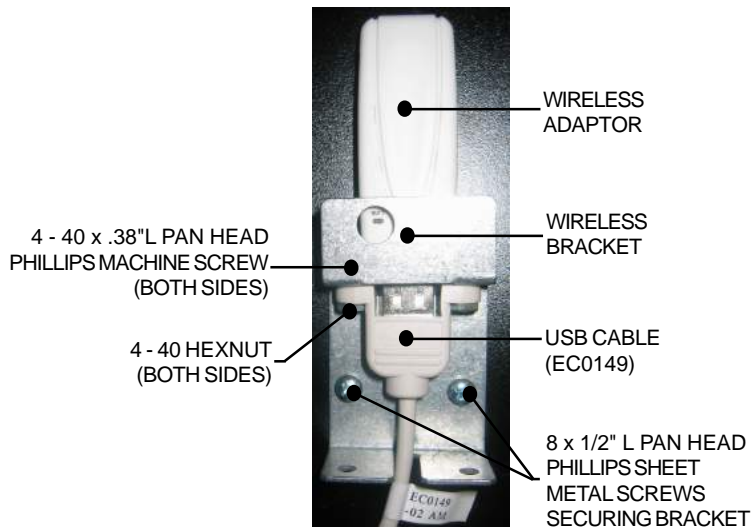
WIRELESS DEVICE ASSEMBLY
